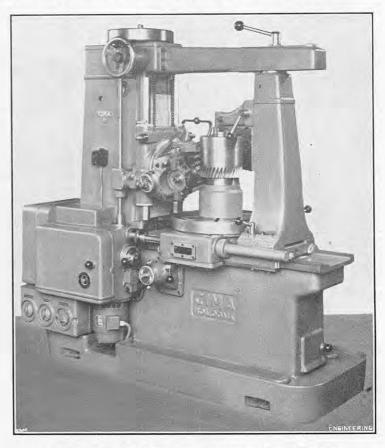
C.I.M.A. Automatic Universal Gear Hobber; ACBARS, LTD.
